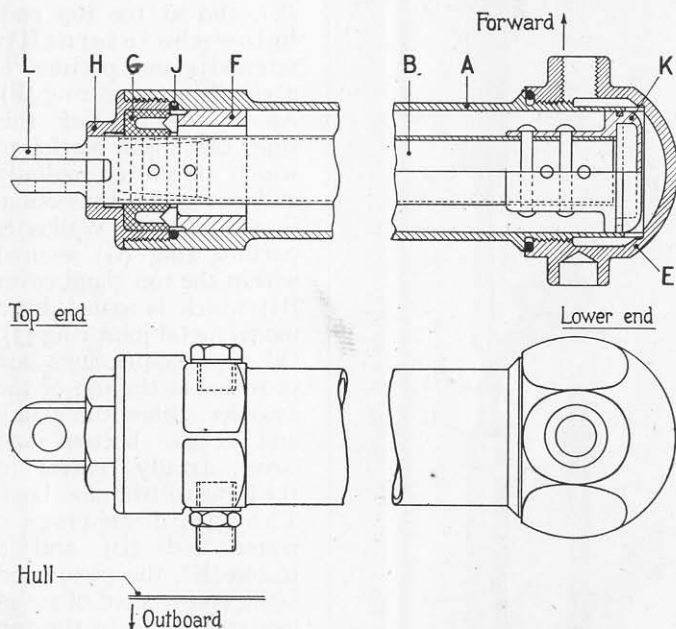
Undercarriage retracting gear hydraulic ram.
